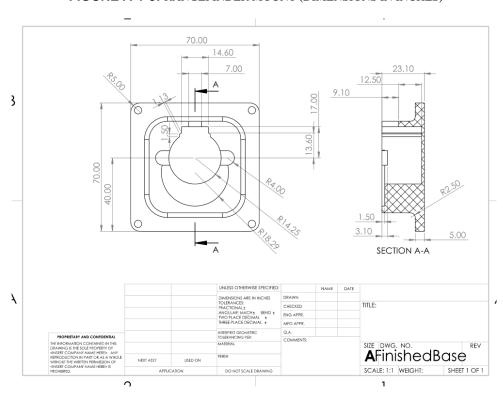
BASE FOR LIDAR HOUSING (DIMENSIONS IN INCHES)
